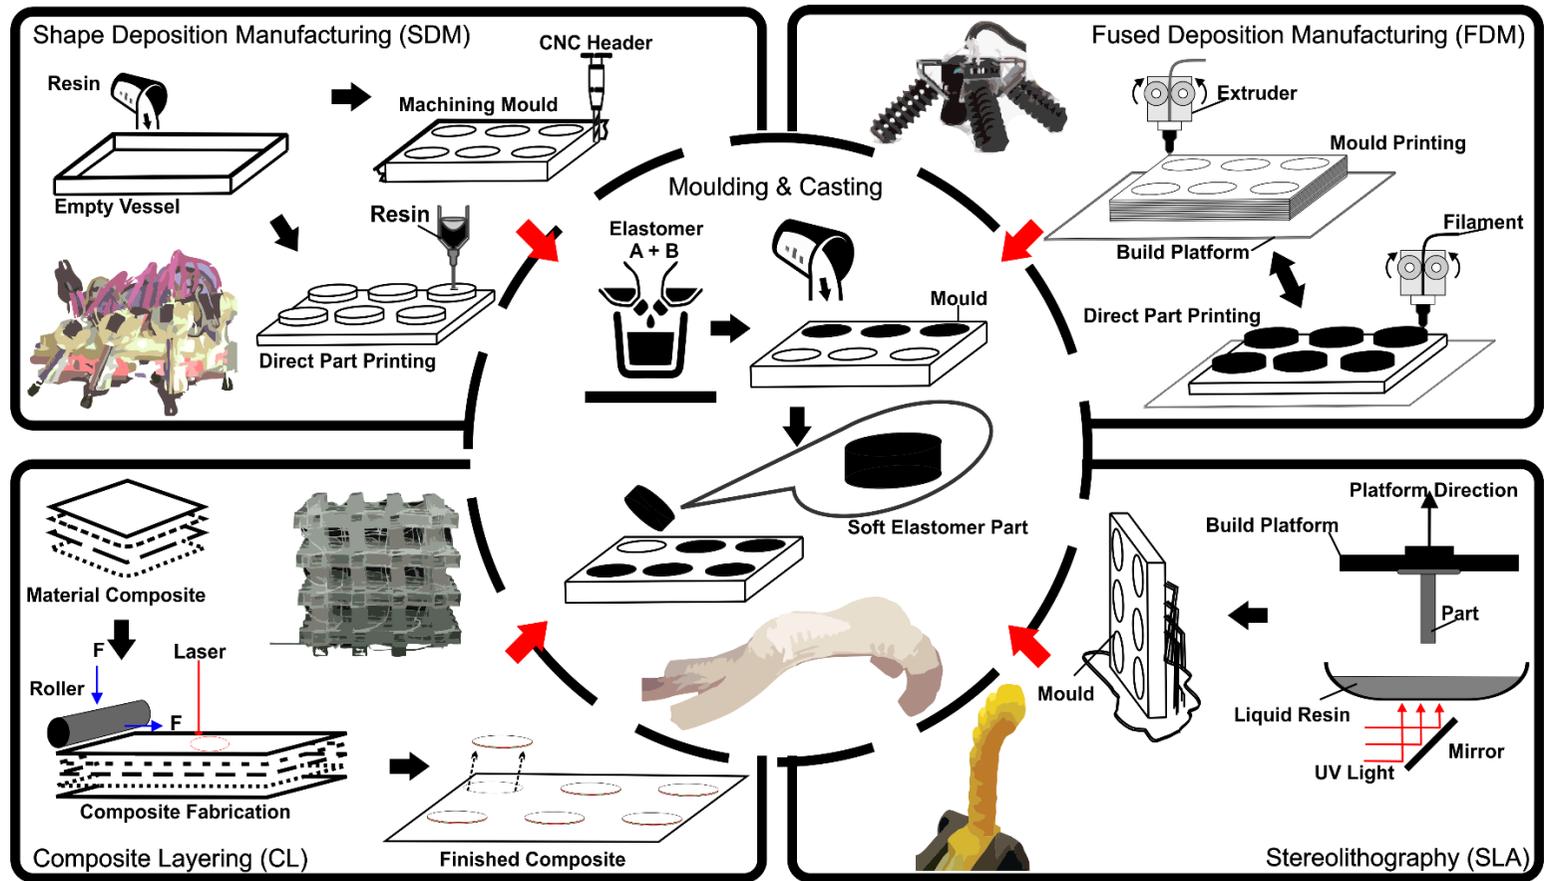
Soft Fabrication Map. Illustration of the core manufacturing methods used to fabricate soft robotics. Moulding and casting form the centre technique and core fabrication method of soft robots. The surrounding four types of additive manufacturing methods further assist, enable and advance the development of soft robotic fabrication [35, 59-62].
